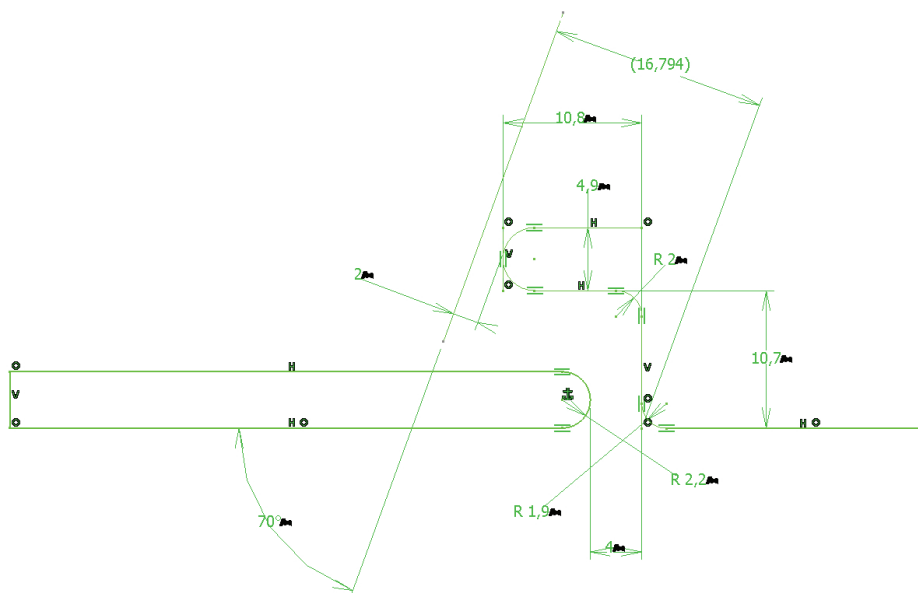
Reference section corner door with crash profile – Under consideration of door opening angle 70° and clearance (2mm) the minimum distance between theoretical door corner and outer pillar surface is 16.794 mm.
